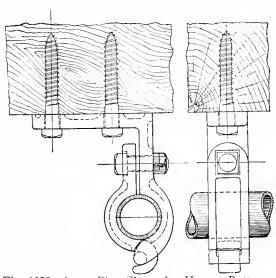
Acme Pipe Clamp for Use on Bottom of End Sill, Longitudinal Sill. Western Railway Equipment Company.
